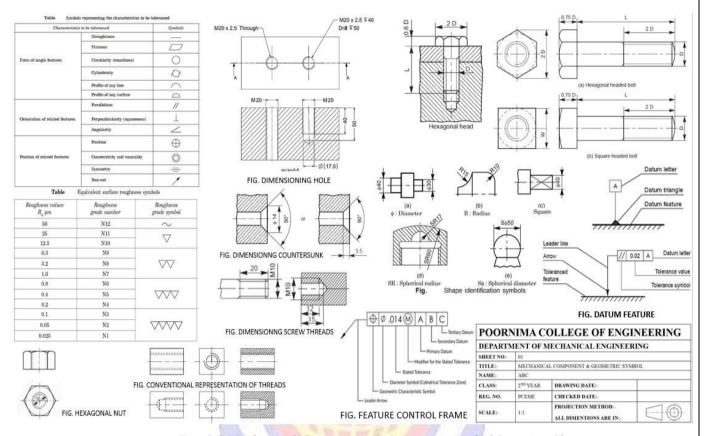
Mechanical Component & Geometric symbol Drawing Sheet
